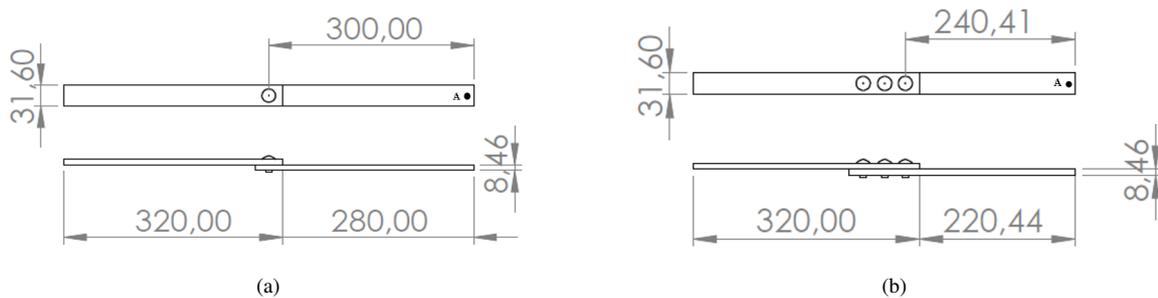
Draft of the beams assembly by (a) one rivet and (b) three rivets.
